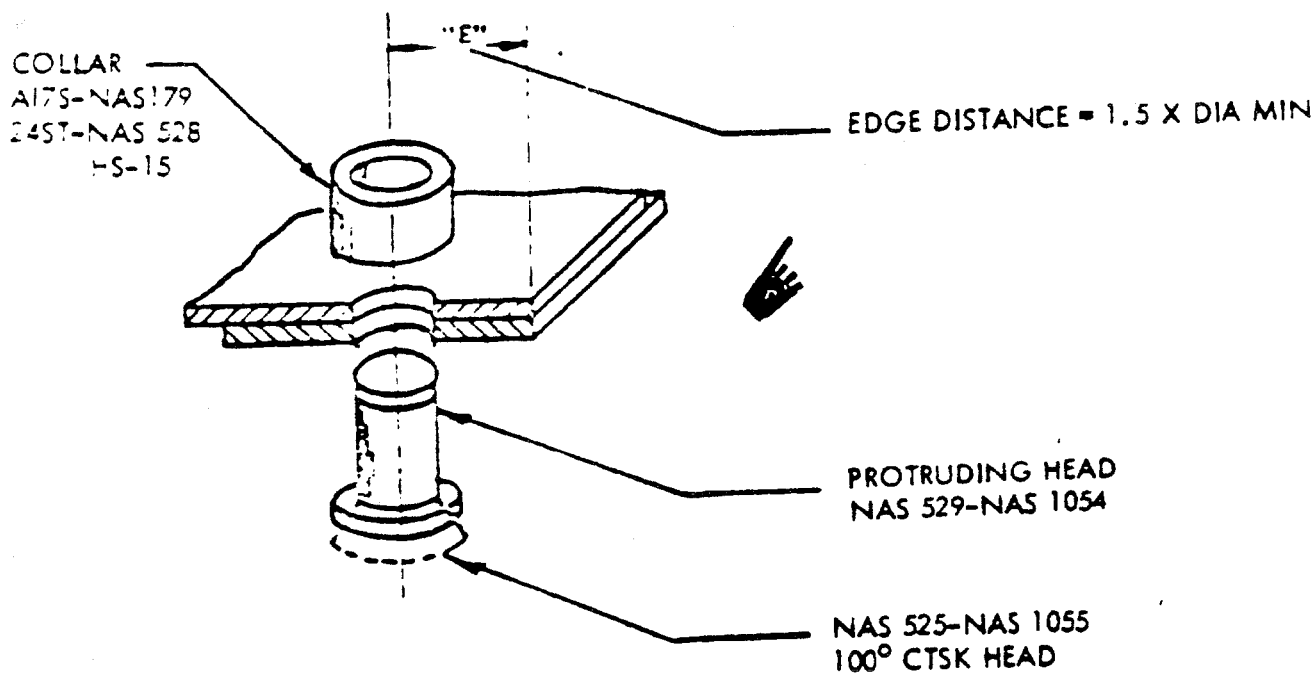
OVERSIZE HI-SHEAR RIVET HOLES
